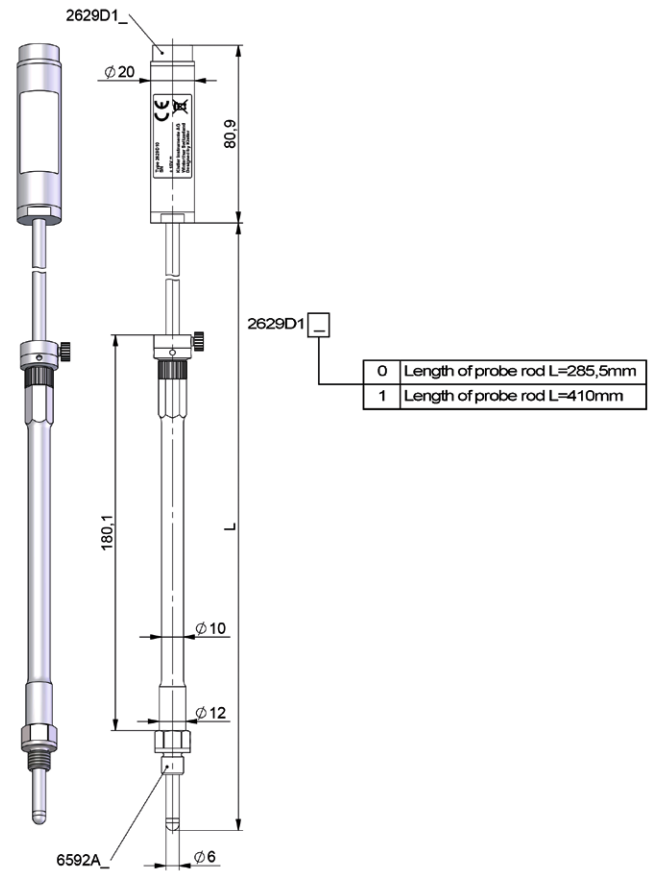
Dimensions of TDC probe Type 2629D10/2629D11
